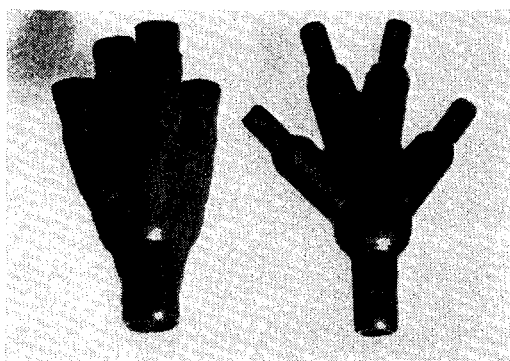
HEAT-SHRINKABLE BOOT WITH MULTIPLE OUTLETS
